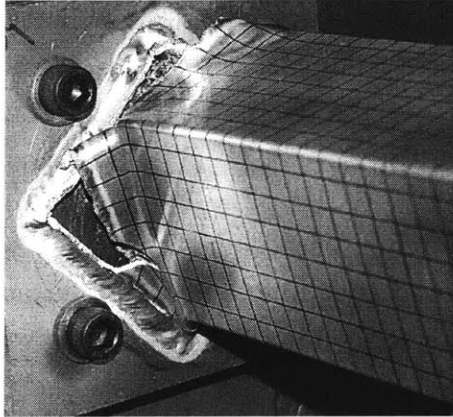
Welding failure of the end fixture of a tube
